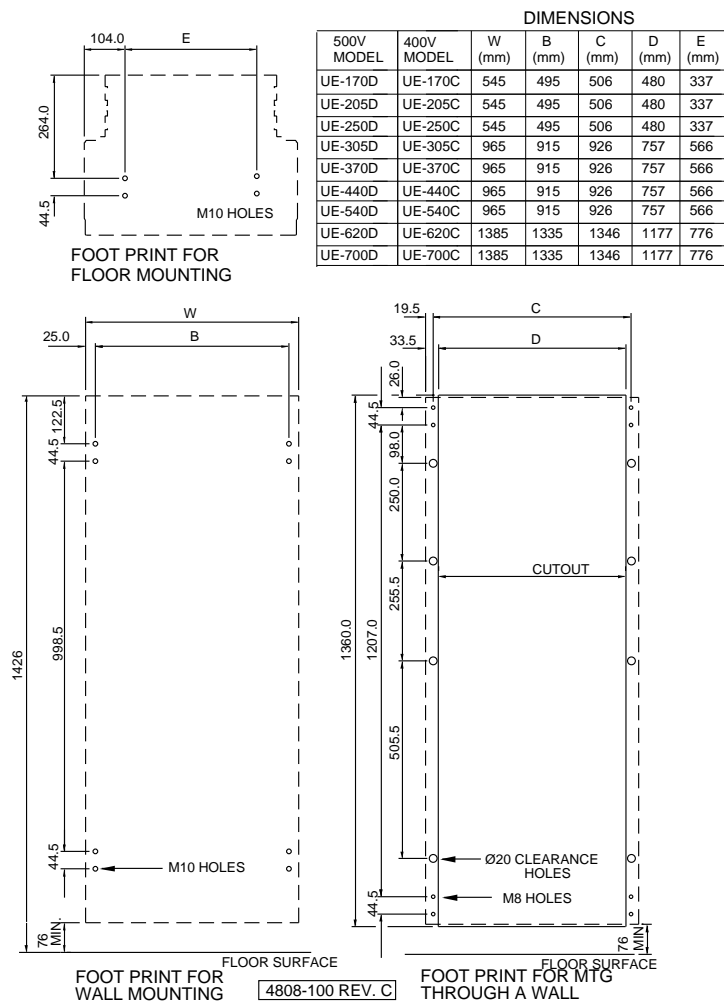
Ultradrive E-Series Frames 5 to 7 Mounting Details
